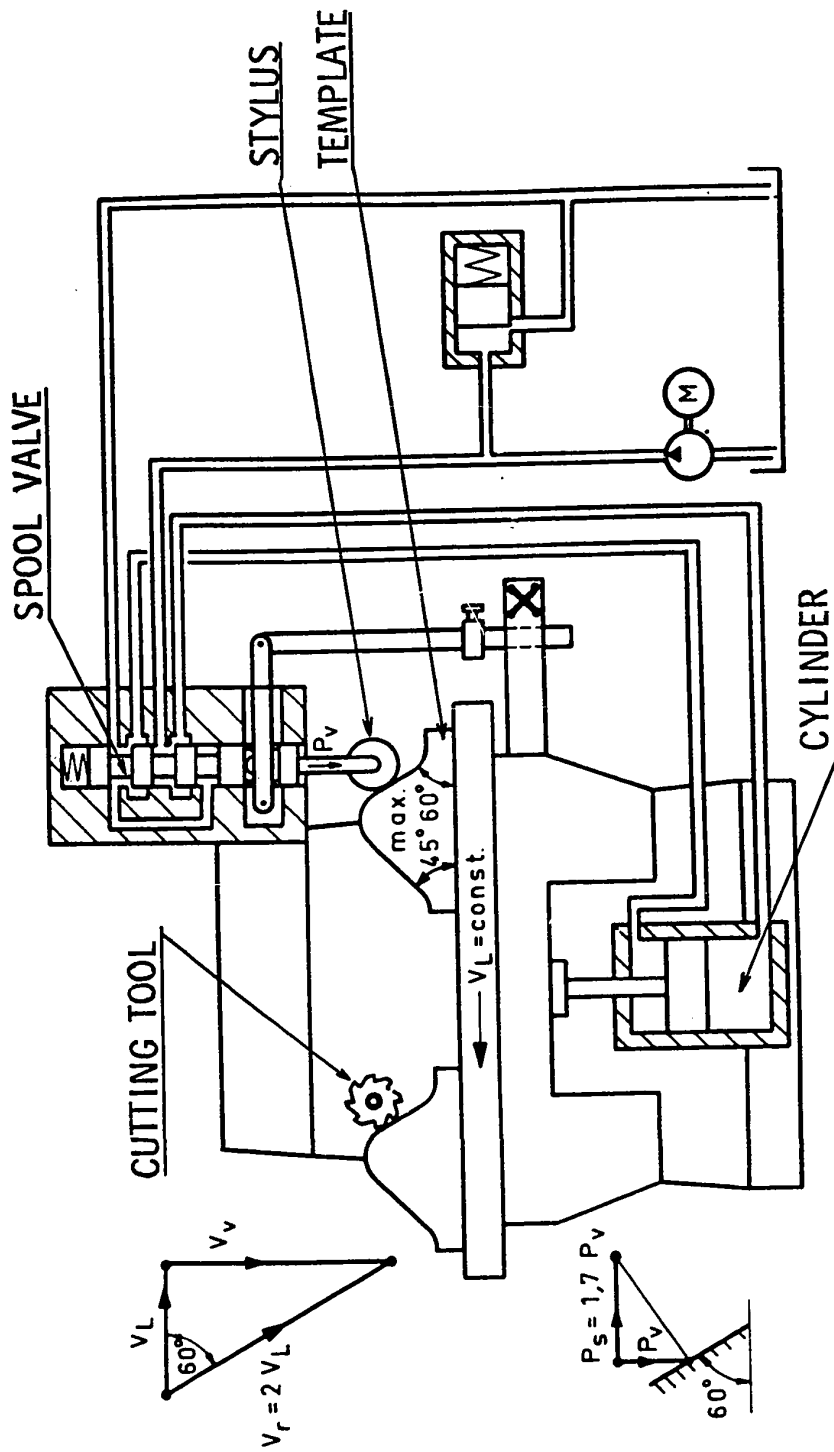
TWO-DIMENSIONAL HYDRAULIC COPYING SYSTEM IN A MILLING MACHINE
